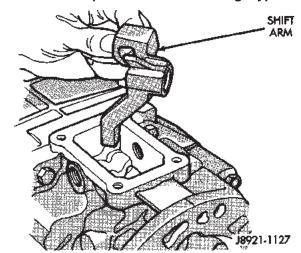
Position Shift Arm in Adapter or Extension Housing
